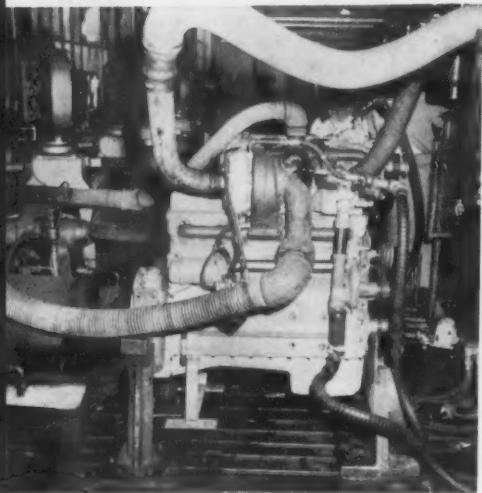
Each turbocharger must meet rigid test qualifications imposed by long run in test period as shown being performed here.
